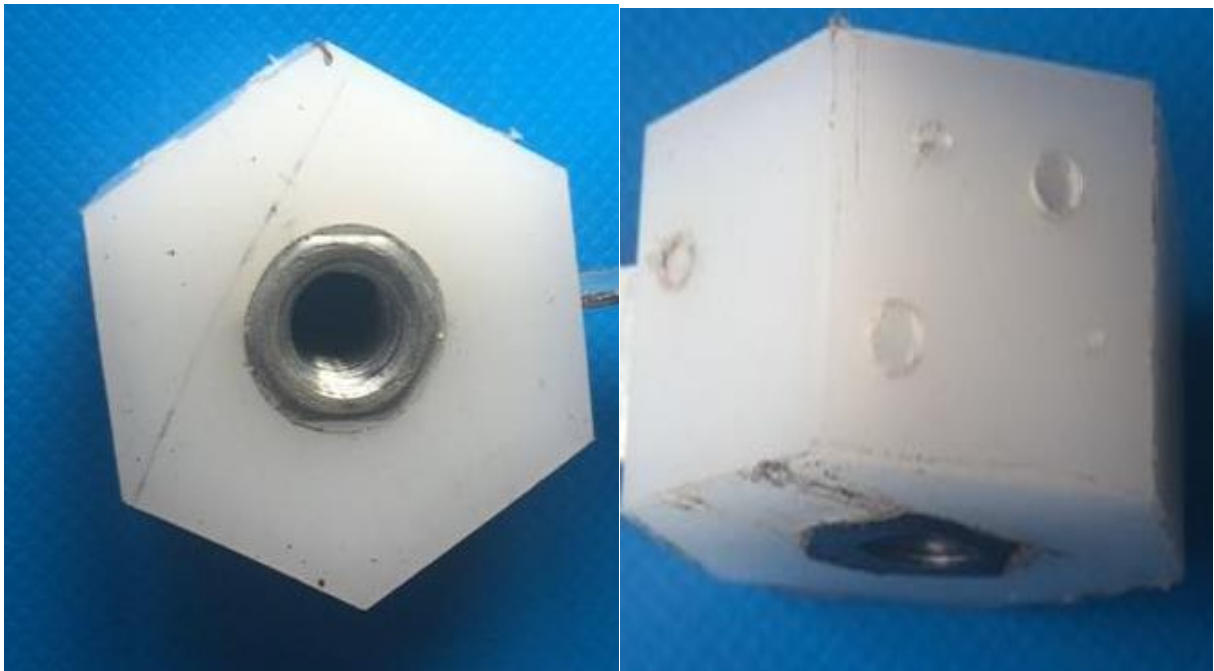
7 Connection Part between Vacuum Aluminium Pie Holder and Gear Shaft.
